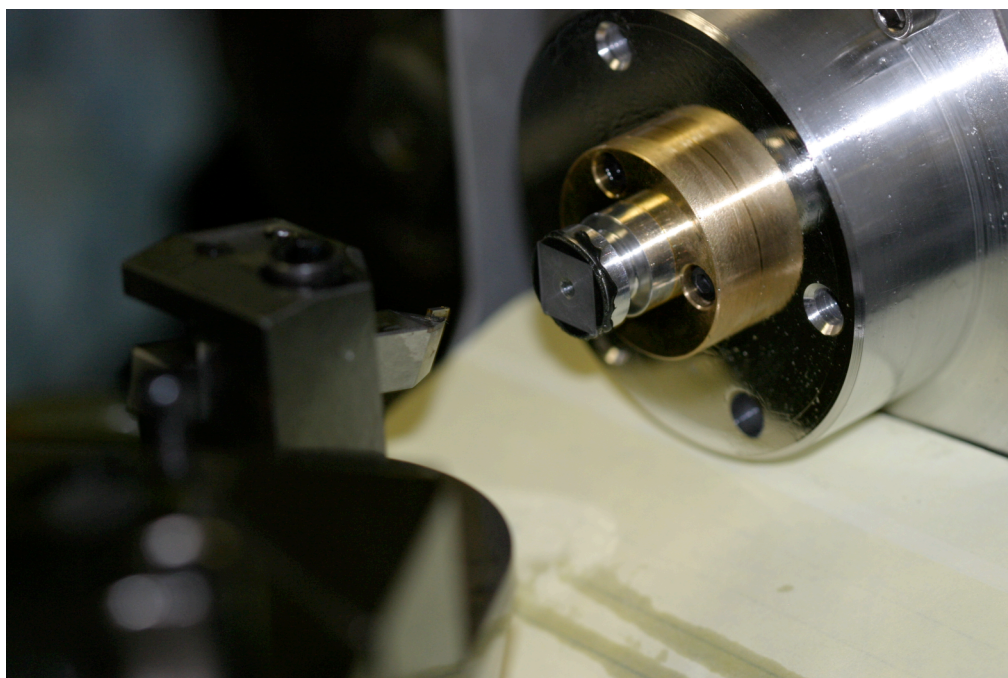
Test setup for machining BGO (square piece glued to spindle)
